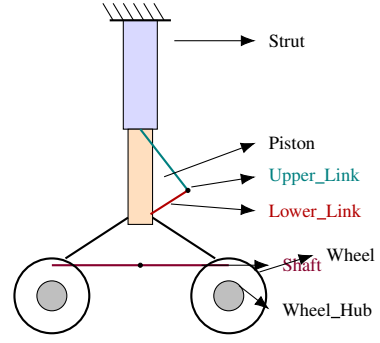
Labeled kinematic schematic of the seven-part assembly: the Strut–Piston cylindrical (sliding) joint, the Strut–Upper_Link–Lower_Link–Piston scissor mechanism, and the Shaft–Wheel_Hub–Wheel rotating axle group.
